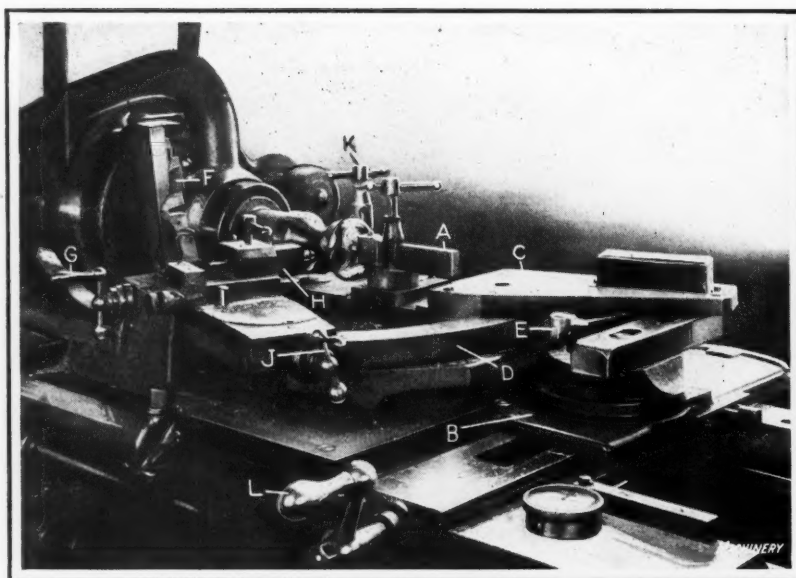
Attaining an Accurate and Brilliant Finish on Microscope Nose-pieces by turning and facing with Diamonds
